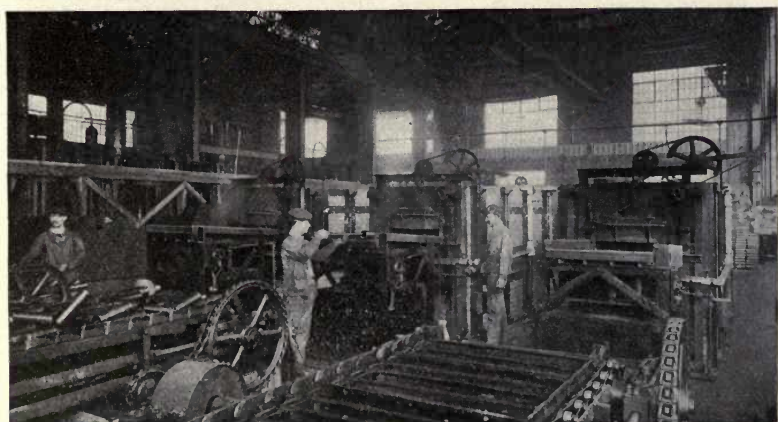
Tempering Furnaces—Charging End—Conveyer from Quenching Tank.
